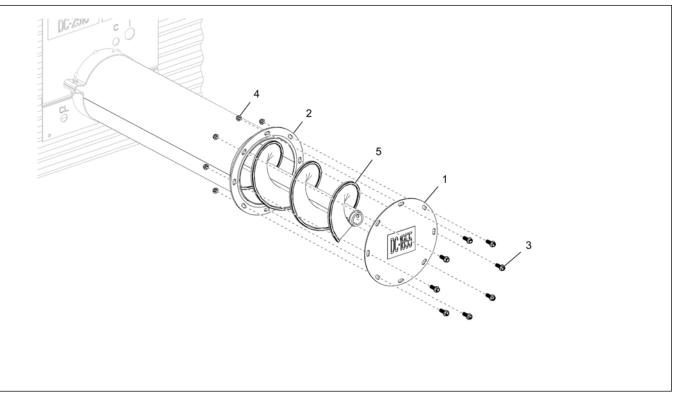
10" Unload tube flight parts (24' - 30' Bins)
